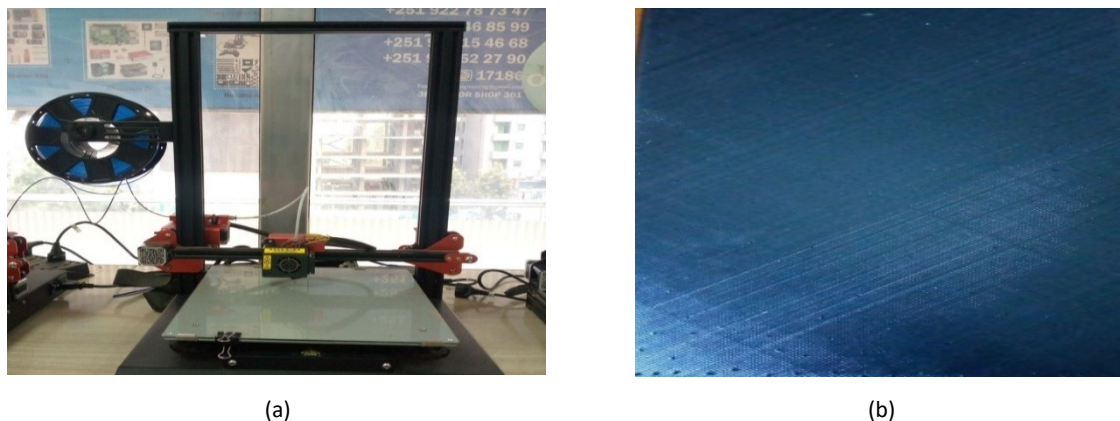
(a) 3D printing machine and printed PLA layer (b) 3D printed PLA layer
